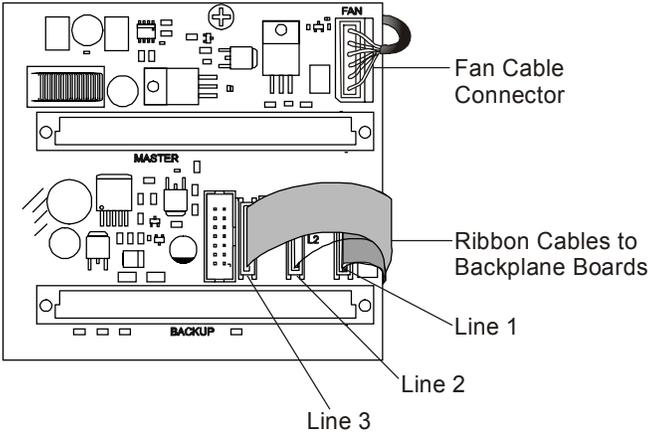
Connecting the Ribbon Cables and Fan Cable
